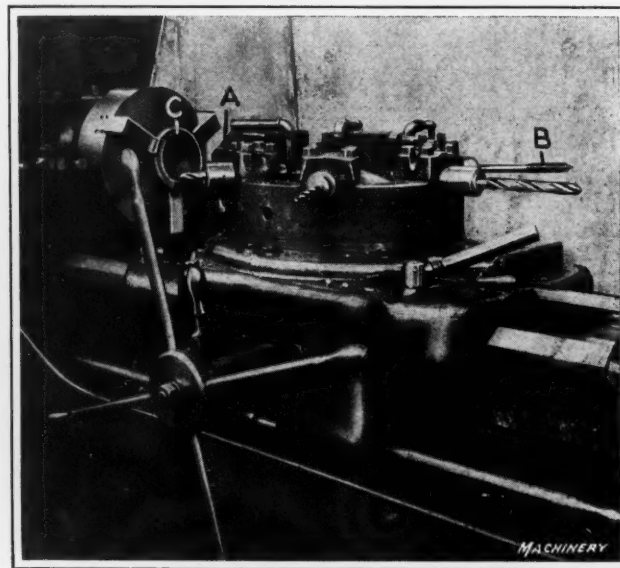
Flat Turret Lathe equipped for roughing out the Bottom of the Forging
